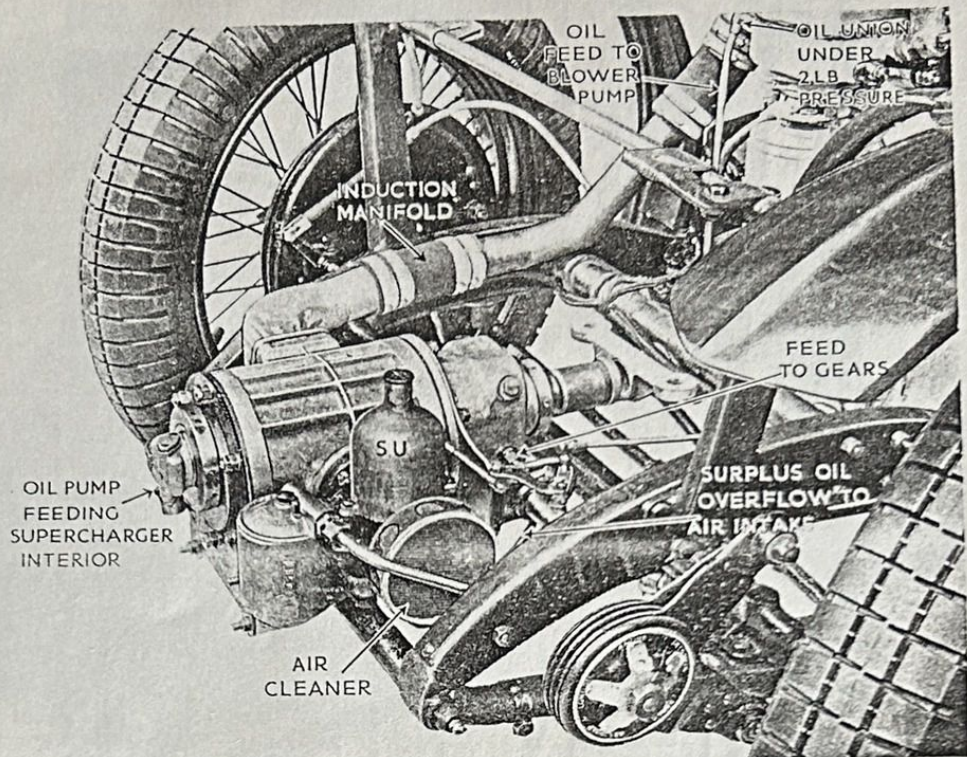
Illustration No. 4.—View of the supercharger carburettor, showing throttle control and air cleaner.
